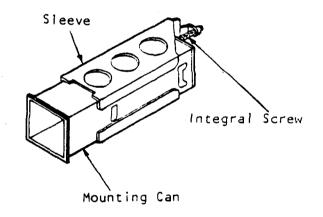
Thrust Reverser Indicator and Mount Assembly
